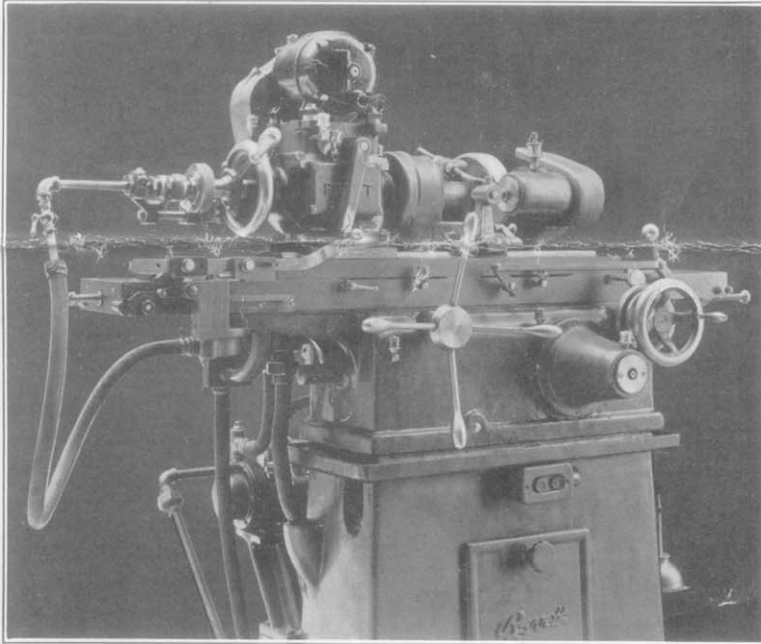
104-Grinder with belt-driven Internal Grinding Spindle Bracket, Spindle, Tip-over Diamond Holder and Lever Chuck Closer. Automatic Table Reciprocation, Work-head Start and Stop and Coolant Control, 3 H.P. Main Drive Motor: ¼ H.P. Work-head Motor, Standard Rivett Ball-bearing Grinding Spindle
